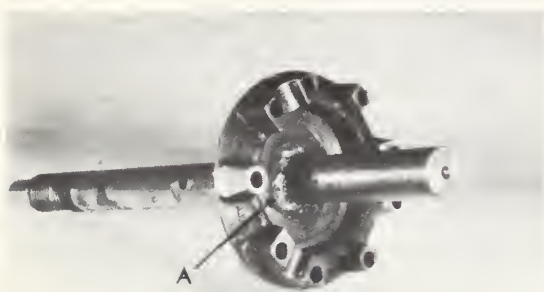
Countershaft welded into half of the differential case at A.
